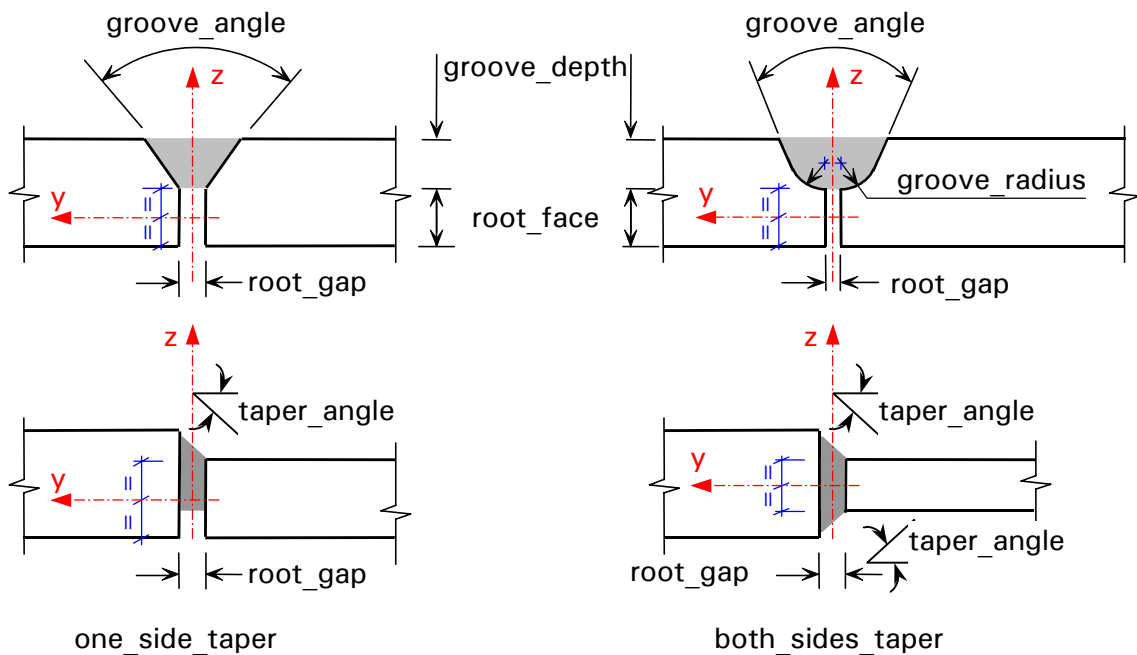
Defining the attributes of `weld_mechanism_groove_beveled`
